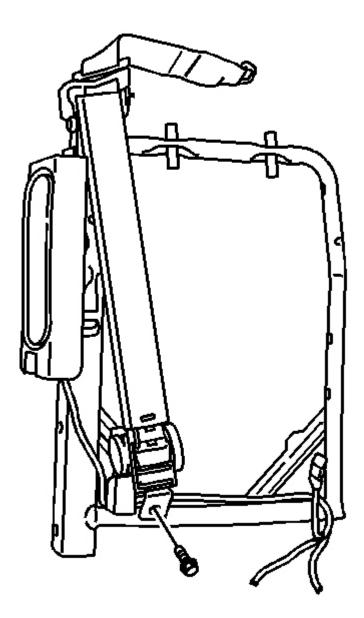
View Of Lower Seat Belt Retractor Retaining Bolt & Nut Courtesy of GENERAL MOTORS CORP.
